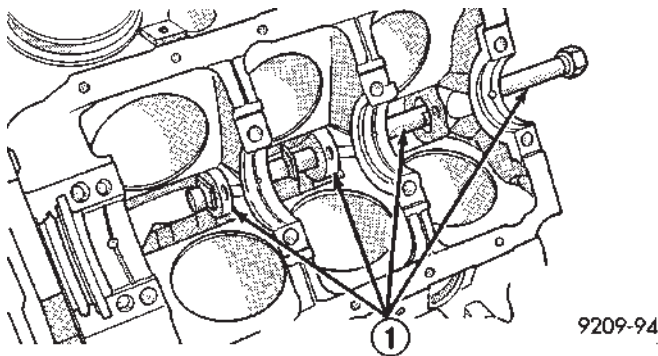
Camshaft Bearings Removal and Installation with Tool C-3132-A
